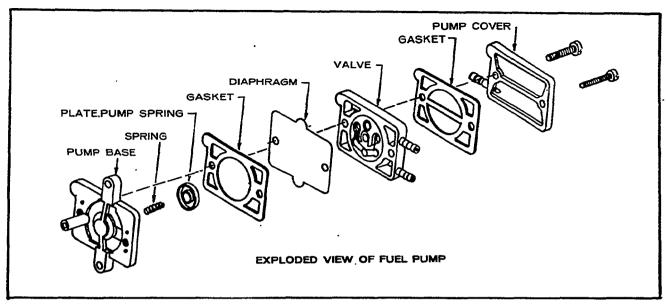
A. EXPLODED VIEW OF FUEL PUMP
